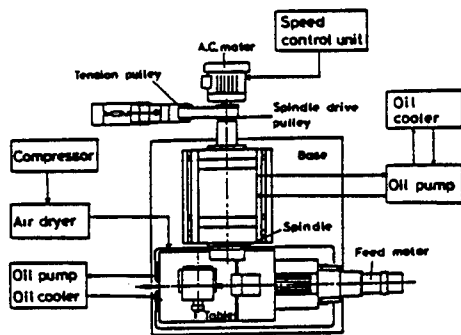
Overview of ultra-high precision milling machine for fly cutting.
